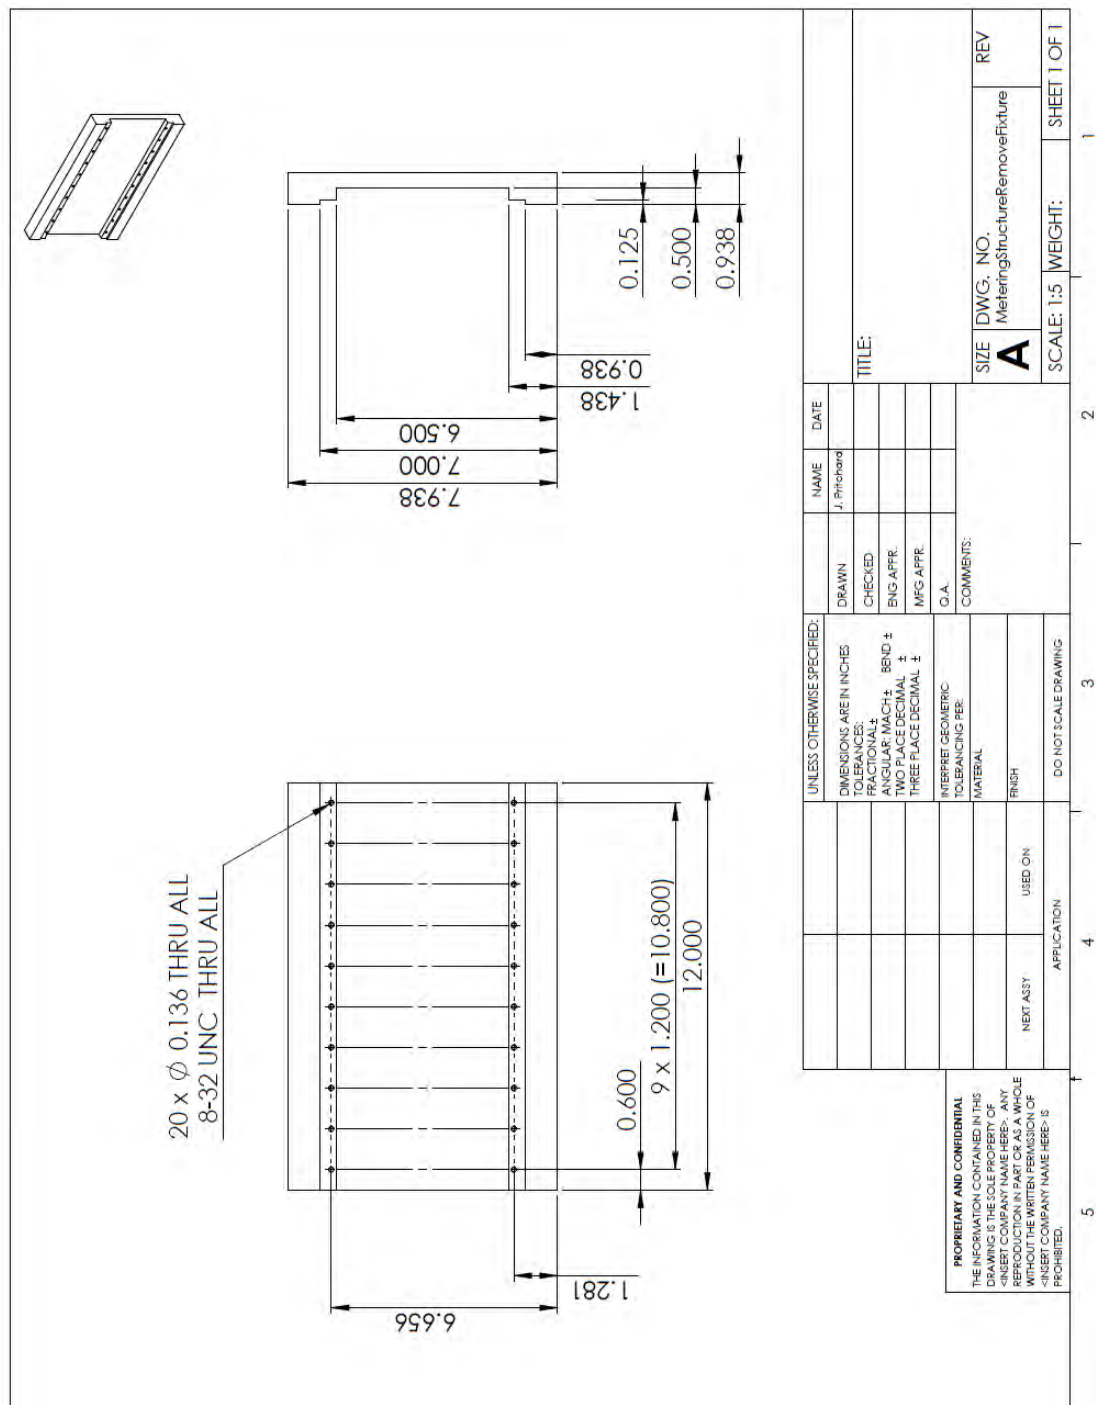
Dimensional drawing of fixture design to assist in the removal of the build plate from the large geometry samples.
